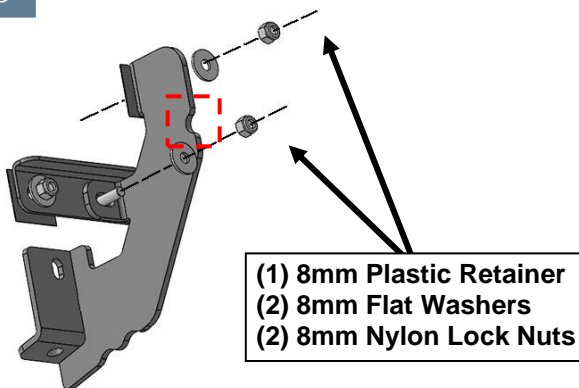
Example of the Mounting Bracket attached to the upper mounting stud and Support Bracket
